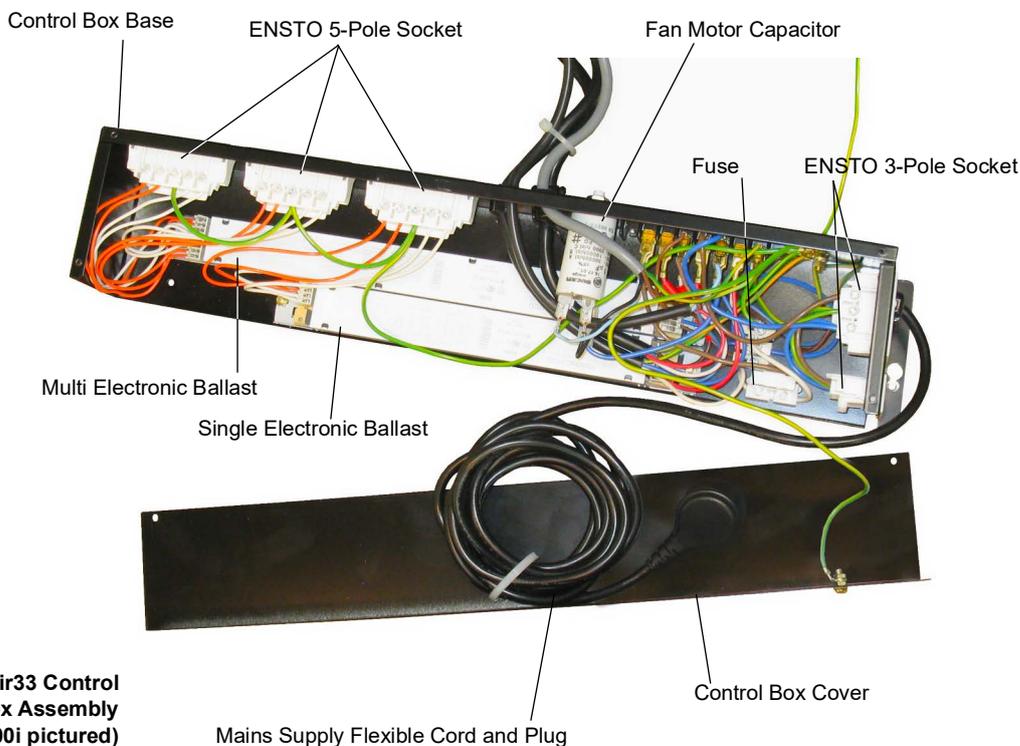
ir33 Control Box Assembly (FDM1200i pictured)
